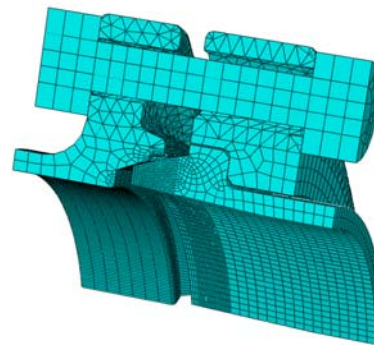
Typical Finite Element Mesh of 3-Bolt Flange Assembly
